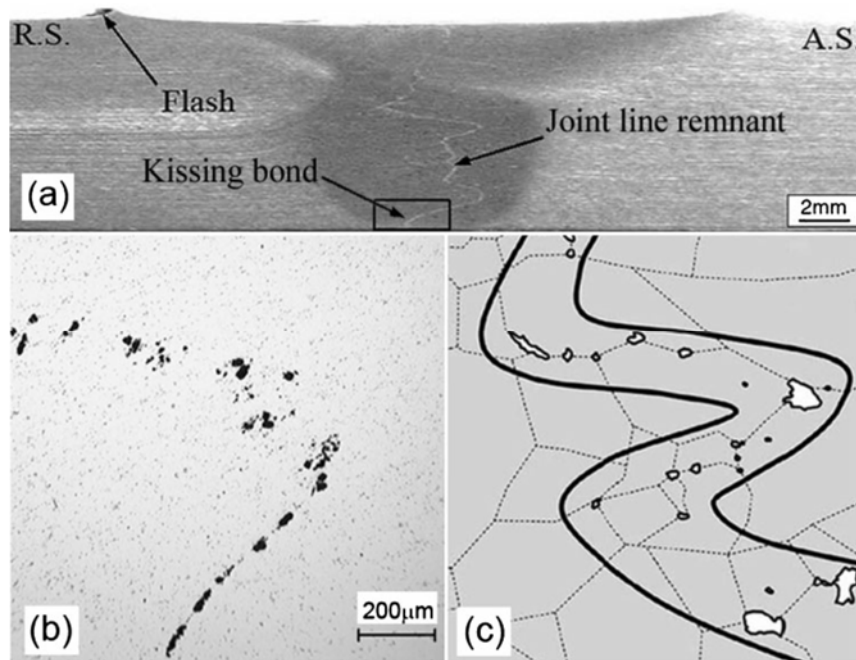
30 Joint line remnant in friction stir welds[135]
